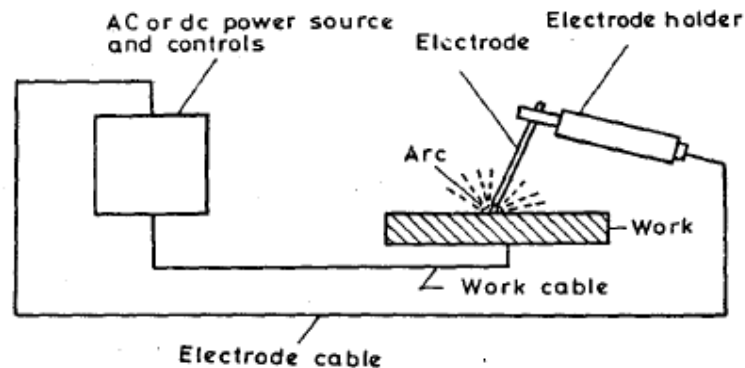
Schematic diagram of SMAW welding (Parmar, 2005)
